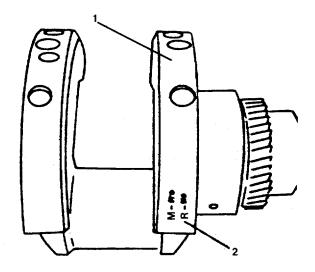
Markings on the Crankshaft for Undersize Main and Connecting Rod Journals.
